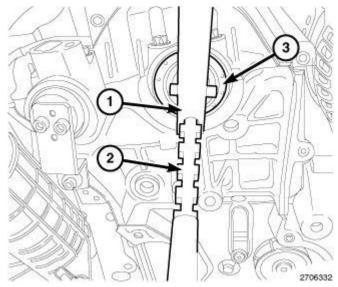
Seal Remover & Seal Courtesy of CHRYSLER LLC
